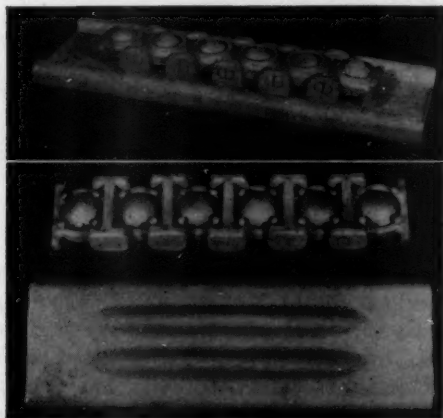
BALL-IN-CHAIN TYPE OF CONSTRUCTION WHICH CAN BE PUSHED OR PULLED TO MOVE HEAVY LOADS AND PERMIT MOVEMENT OR EXPANSION IN ANY DIRECTION. WEIGHT OF LOAD IS CARRIED ON RUNNERS LEAVING BALLS FREE. THE RAIL SECTION, BUILT TO SPAN PIERS, HAS RENEWABLE HARD ALLOY BEARING SURFACE.
